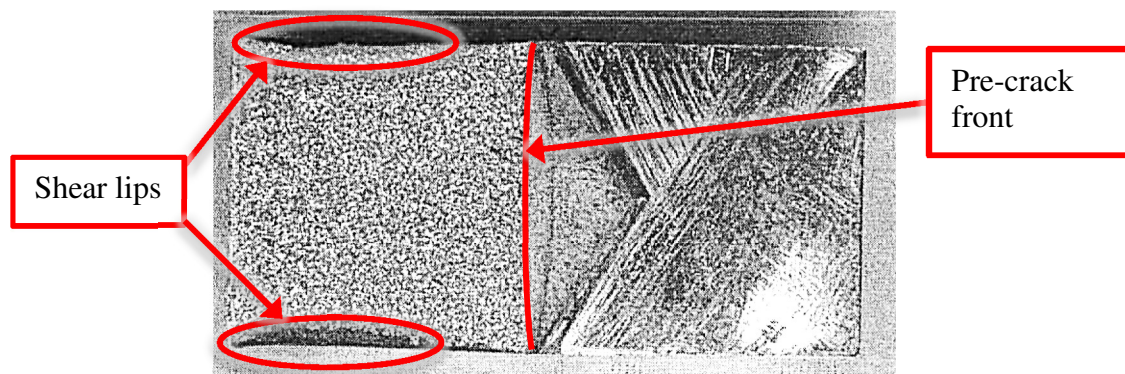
Fracture surface of a fracture toughness test specimen. The rough fracture surface and small shear lips indicate negligible ductile deformations, i.e. occurrence of brittle fracture.
